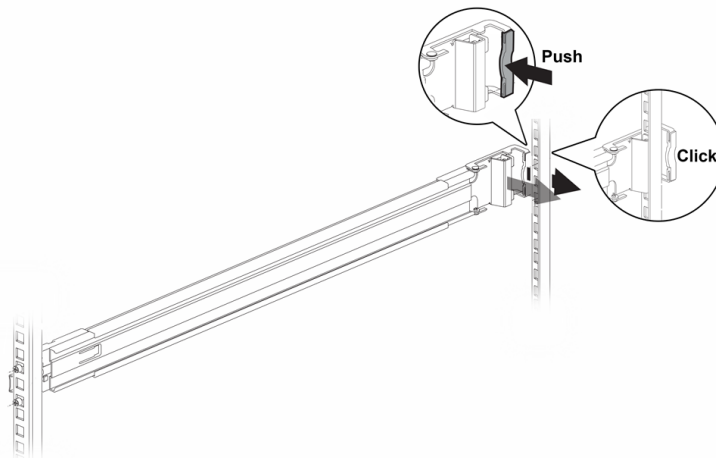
Attaching the Slider Assembly to the Rear Rack Post
